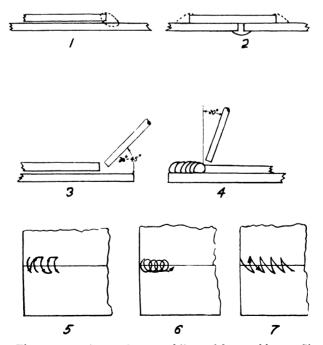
The preparation and arc welding of lap welds. 1 Simple lap; 2 Strap weld; 3 End view of lap weld; 4 Front view of lap weld; 5 Weave motion; 6 Circular motion; 7 Diagonal weave motion
